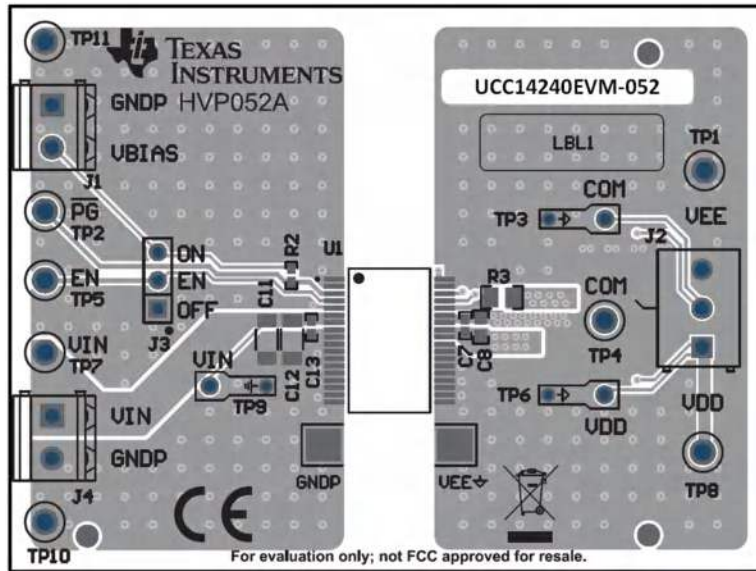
UCC14240EVM-052, PCB Top Layer, Assembly
